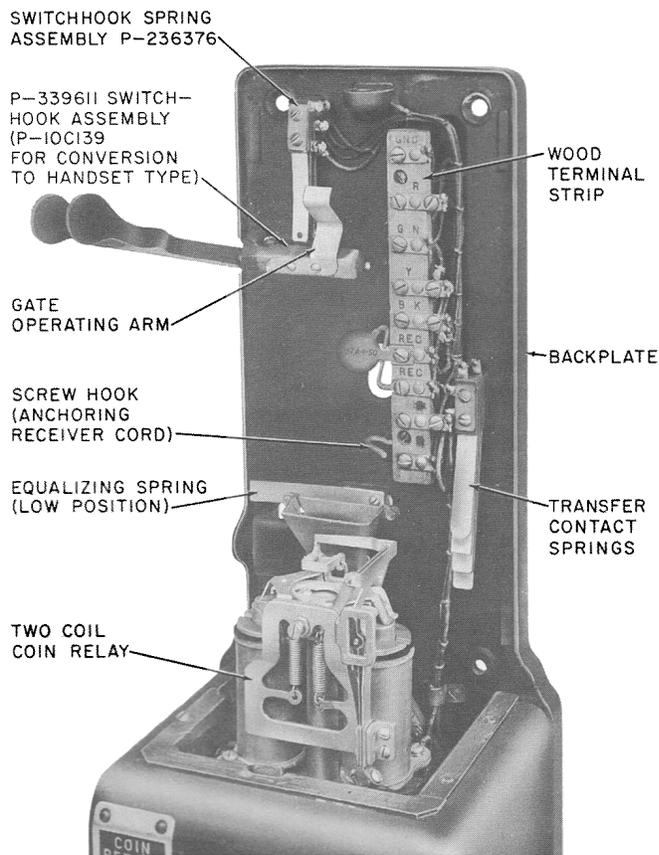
Earlier Type Coin Collector With Wood Terminal Strip
